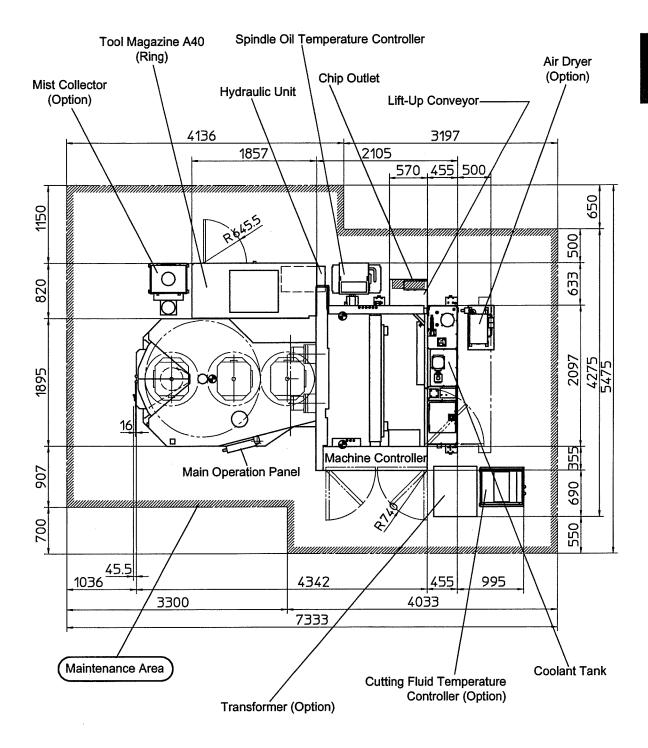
Floor Plan of Machine (Tool Magazine A40 and Left Discharge Lift-Up Conveyor Spec.)
